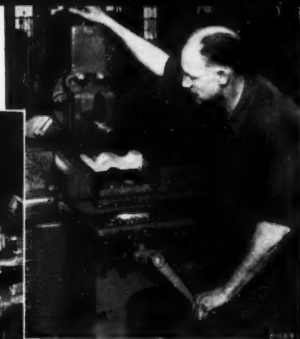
A grooving operation on the interior of the ball ring, performed by equipping an old lathe with an air-operated piston for clamping the work, and an air-controlled boring tool.
